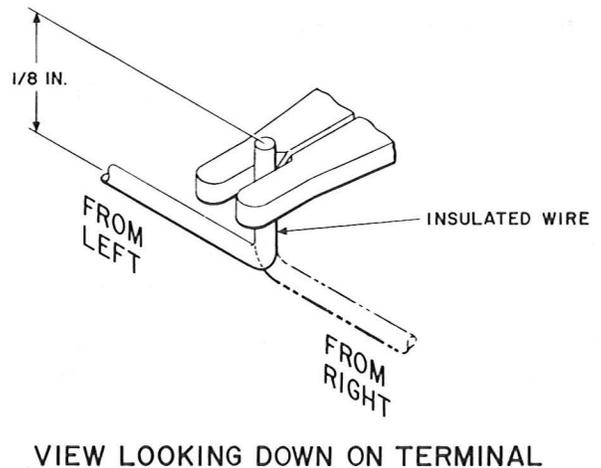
The Dress of Jumpers on Twin-Clip Connecting Blocks
